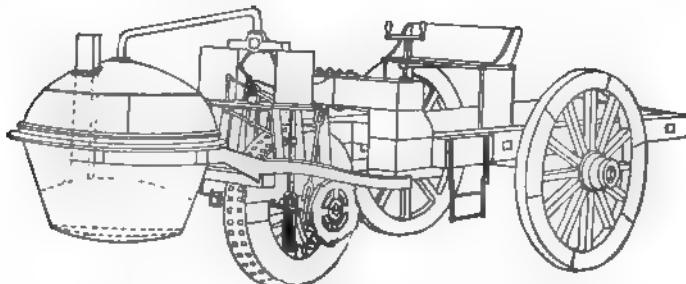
Captain Cugnot's Three-wheel Steam Artillery Carriage (1769-70). This cut shows details of the single flue boiler and of the driving connections.
